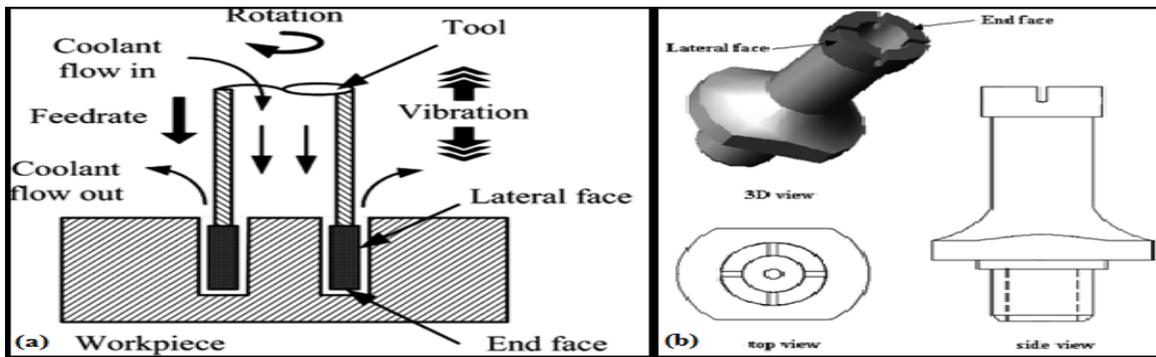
(a) Illustration of RUM process [7], and (b) views of cutting tool [6]
